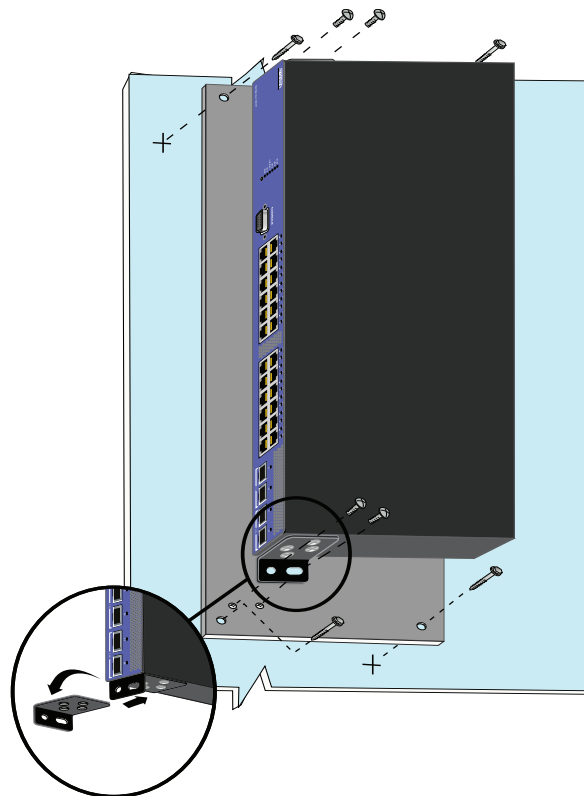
NetVanta 1534P/1544P/1544F Wallmount Installation
